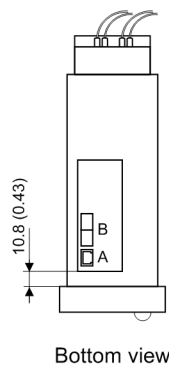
Bottom view of a 7SJ81/7SK81 (housing size 1/6)
